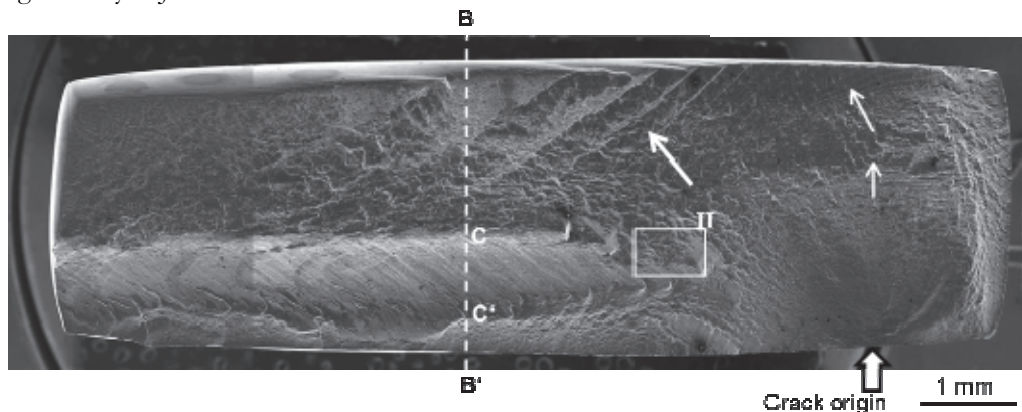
Fatigue fracture surface of weld-480 tested at $\sigma_a = 220 \text{ MPa}$.
